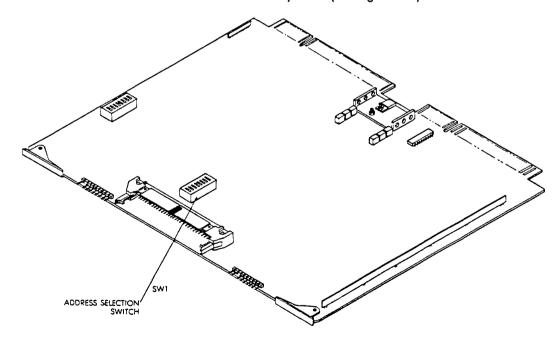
SI 9798 Address Switch Location on KGEM PCB
